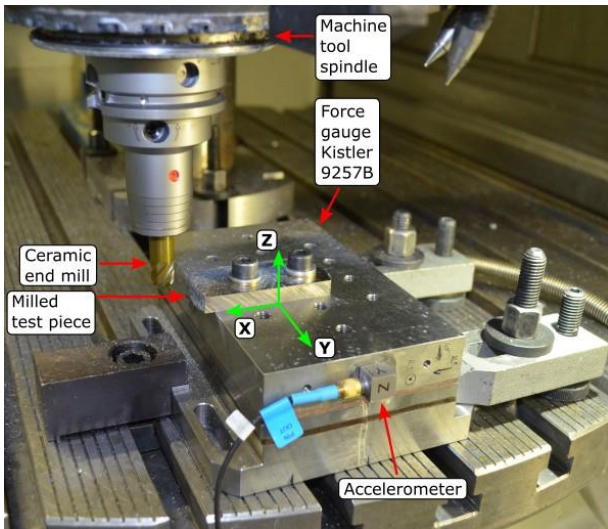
View of the work area of the test bench, shown in Fig. 1, illustrating the mounting of the applied force gauge Kistler 9257B, the workpiece made of a gamma aluminide titanium alloy γ -TiAl, and the side surface of the workpiece being machined with a monolithic ceramic milling cutter, as well as the orientation of the local coordinate system XYZ used in measuring generated variations in cutting forces
